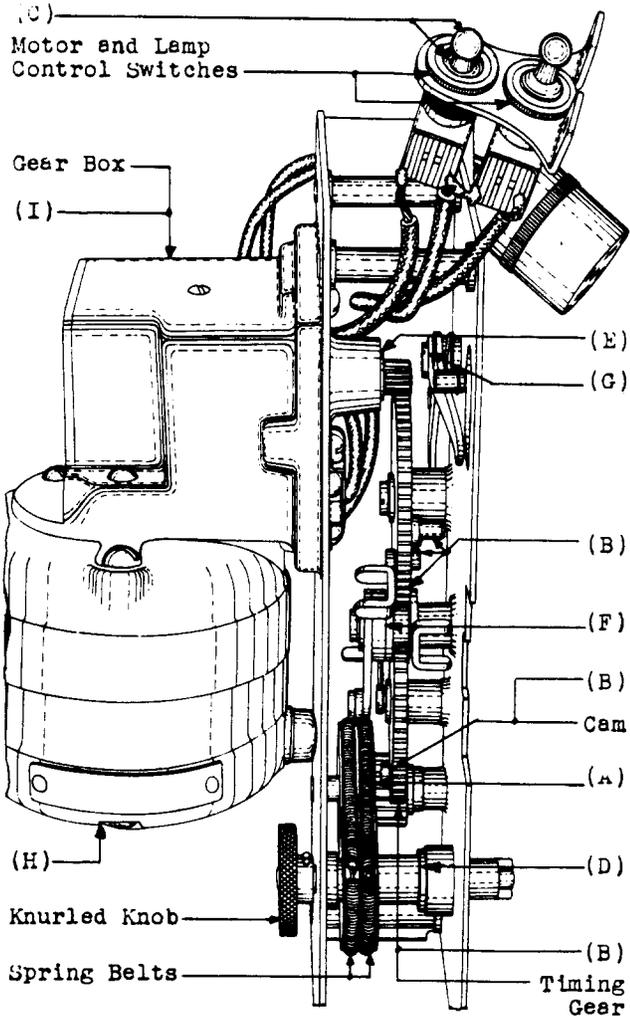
KS-7703 Camera - Motor Drive Unit
